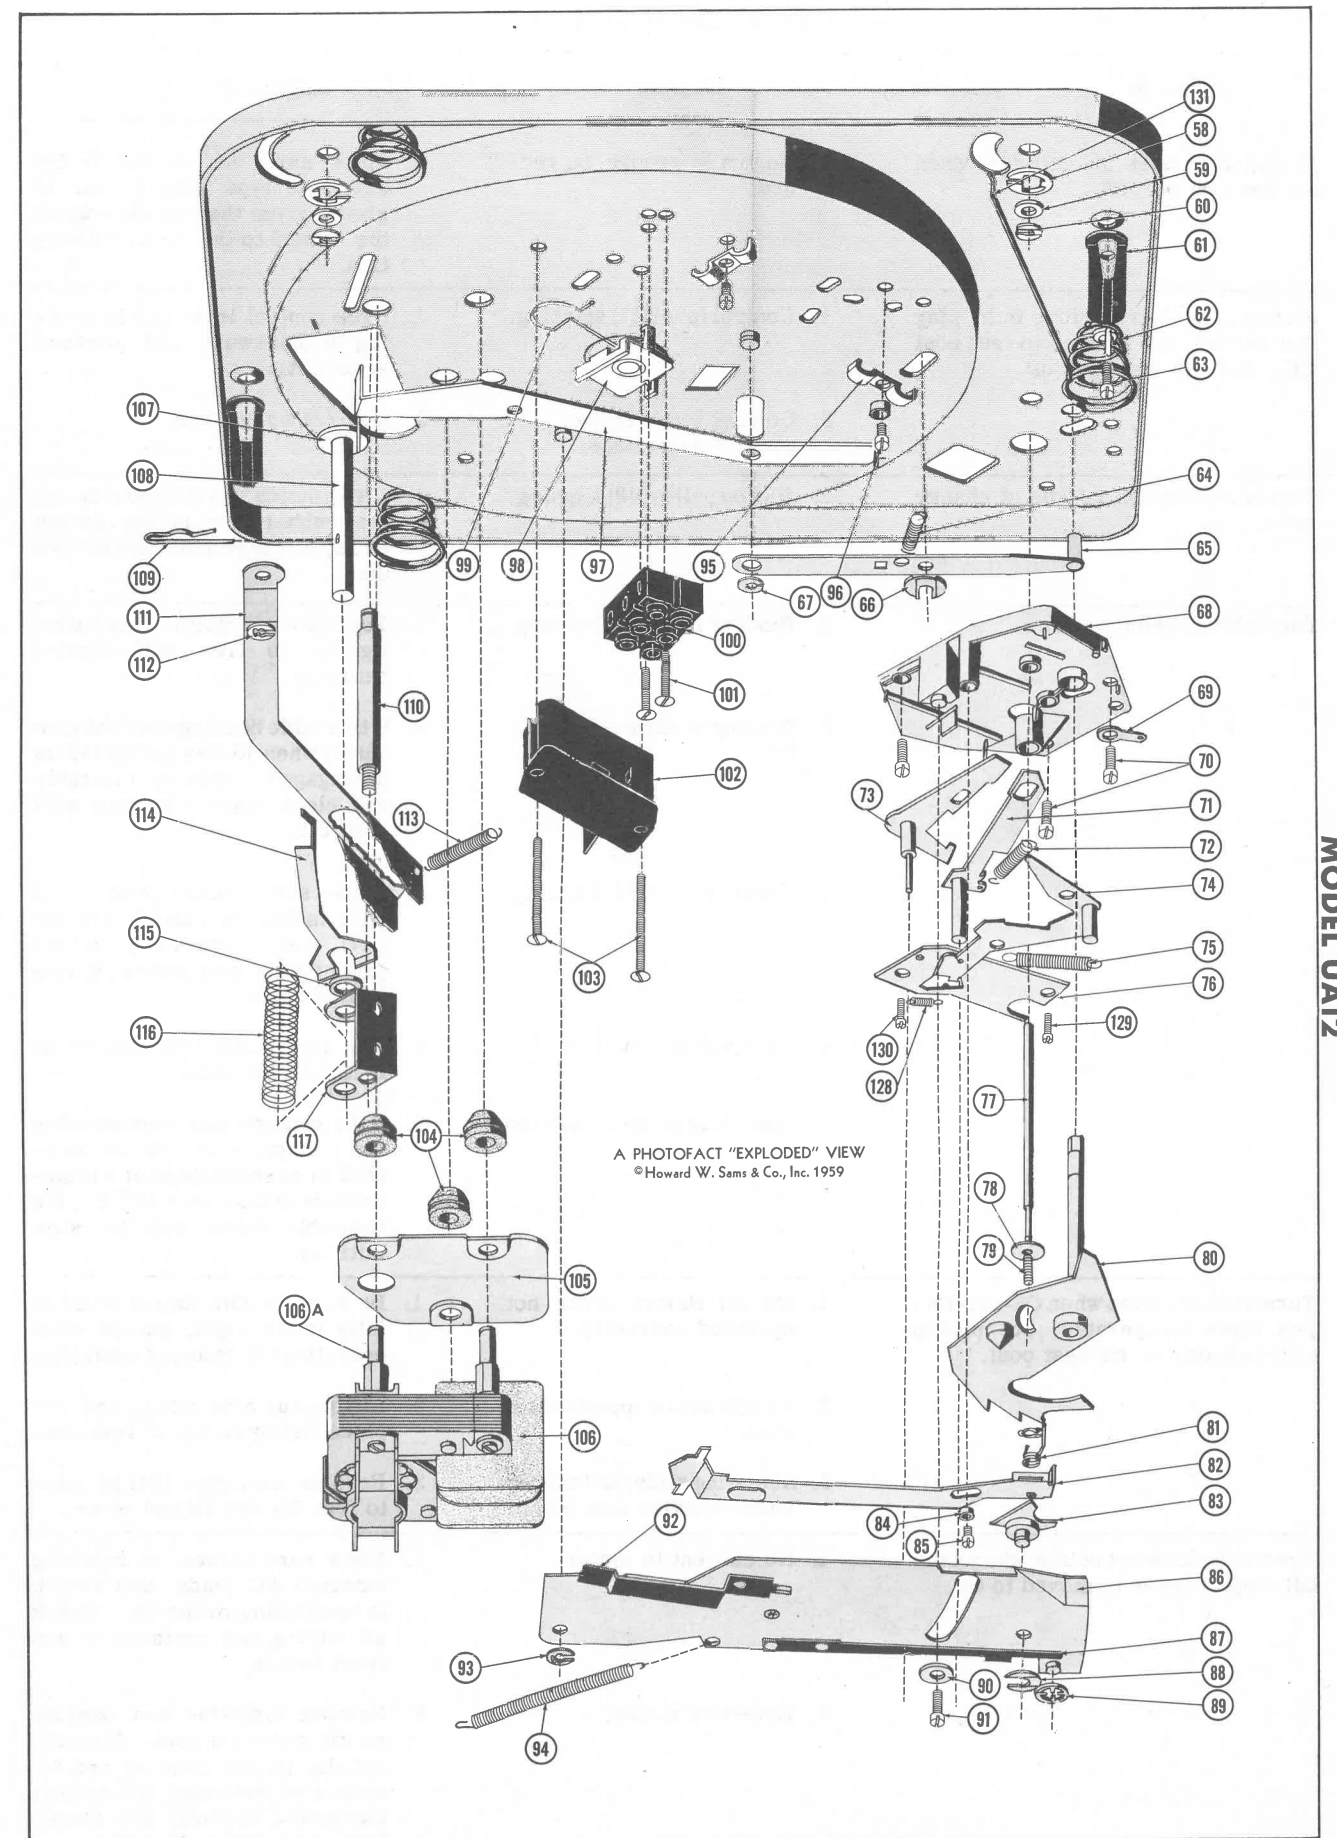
B EXPLODED VIEW OF PARTS BELOW BASEPLATE
